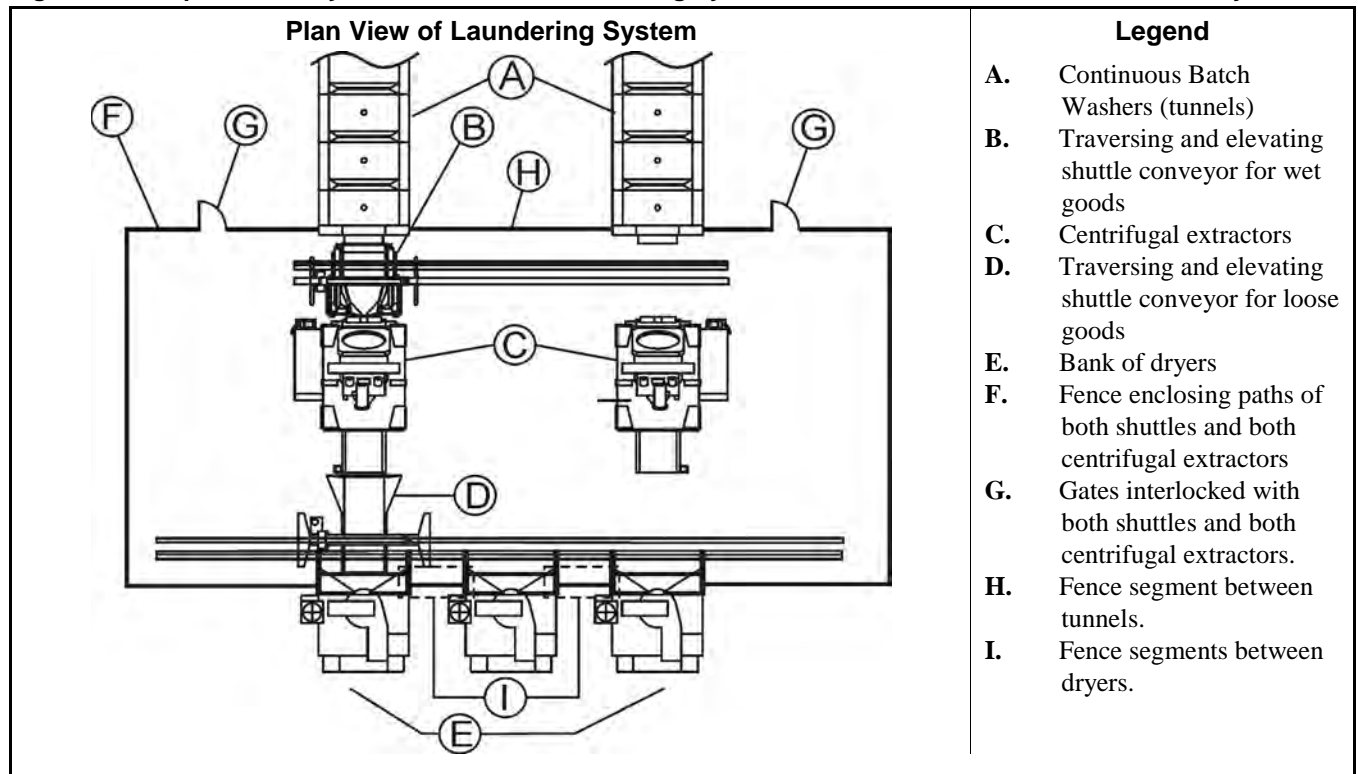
Example Fence Layout for Automated Laundering System Where Two Tunnels Serve a Bank of Dryers
